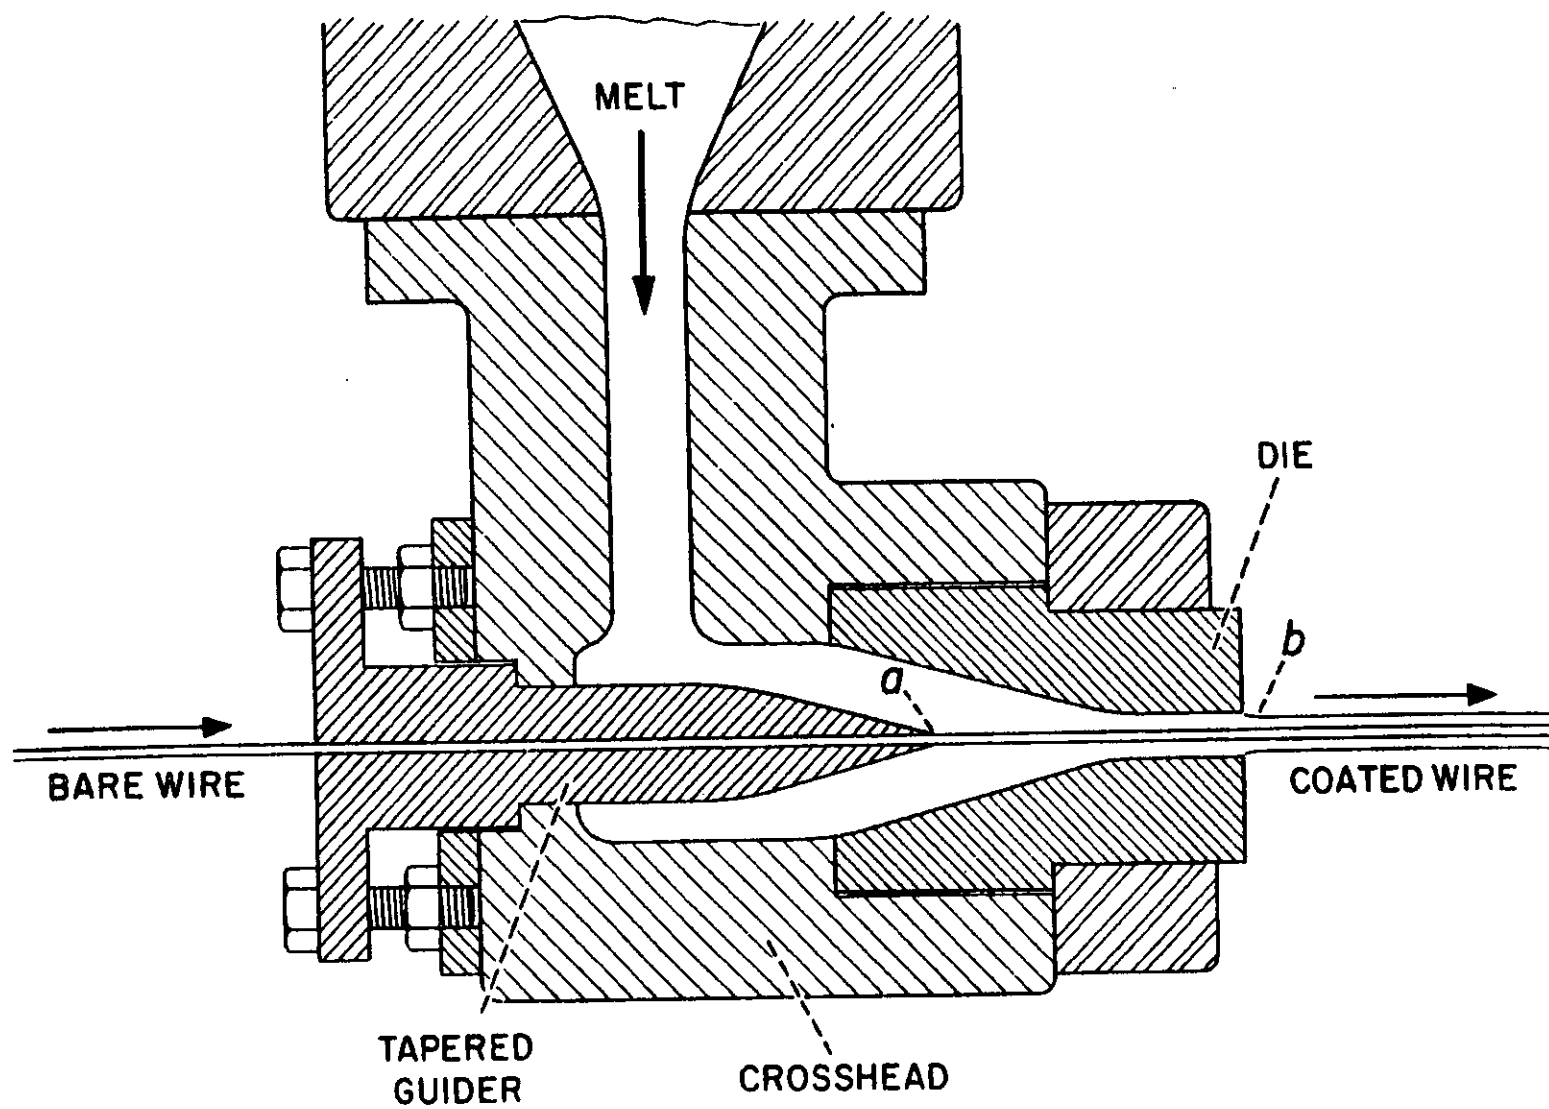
A crosshead holds the wire-coating die and the tapered guider.
